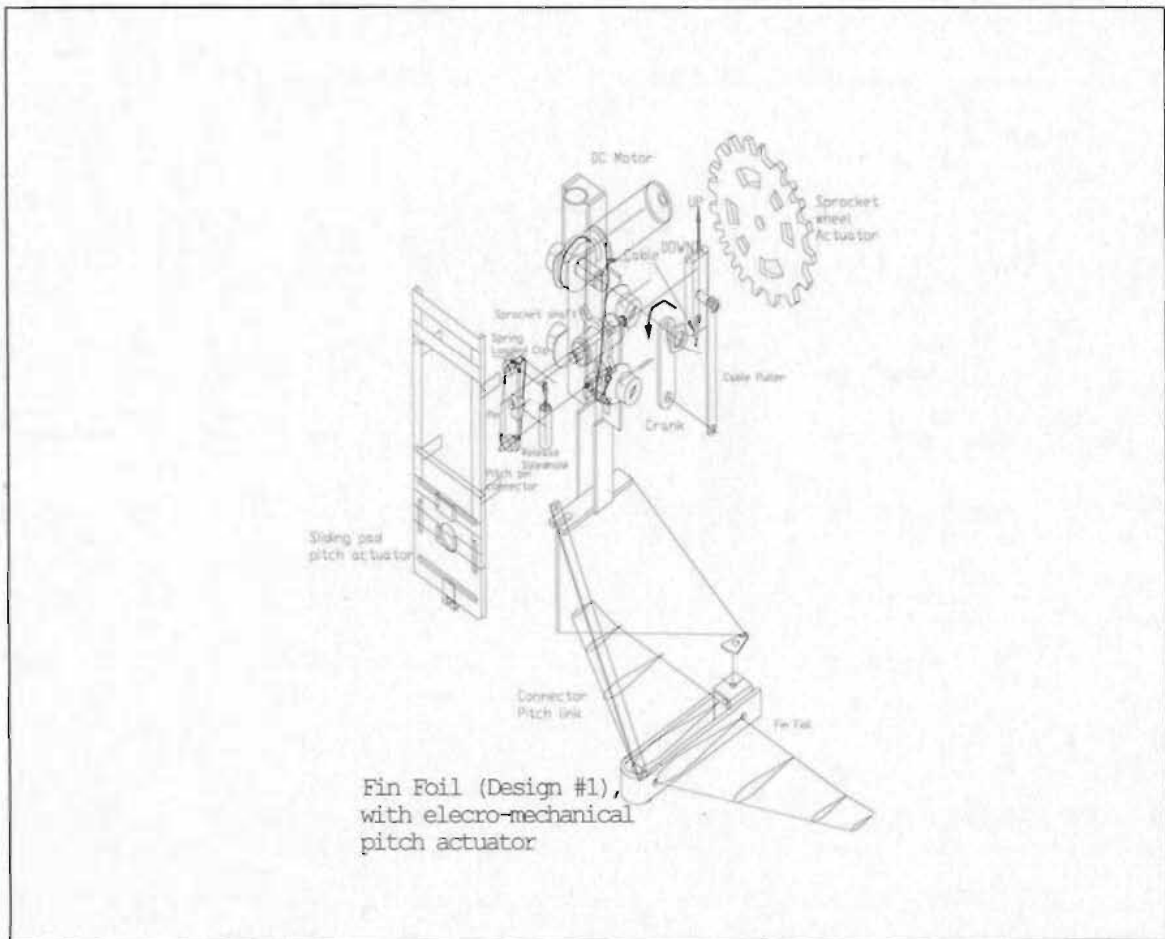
6 Installation assembly of foil design #1 and slider sub-assembly
